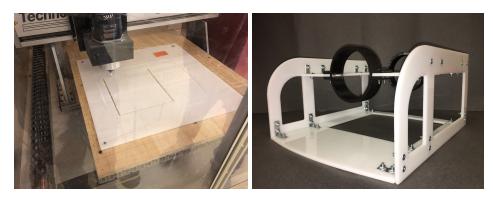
Left - CNC router milling frame components; Right - assembled frame
